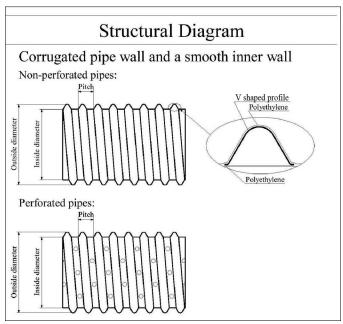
Double - Wall Double-Wall Steel Reinforced Corrugated Polyethylene Pipe - Types I, III and IV
